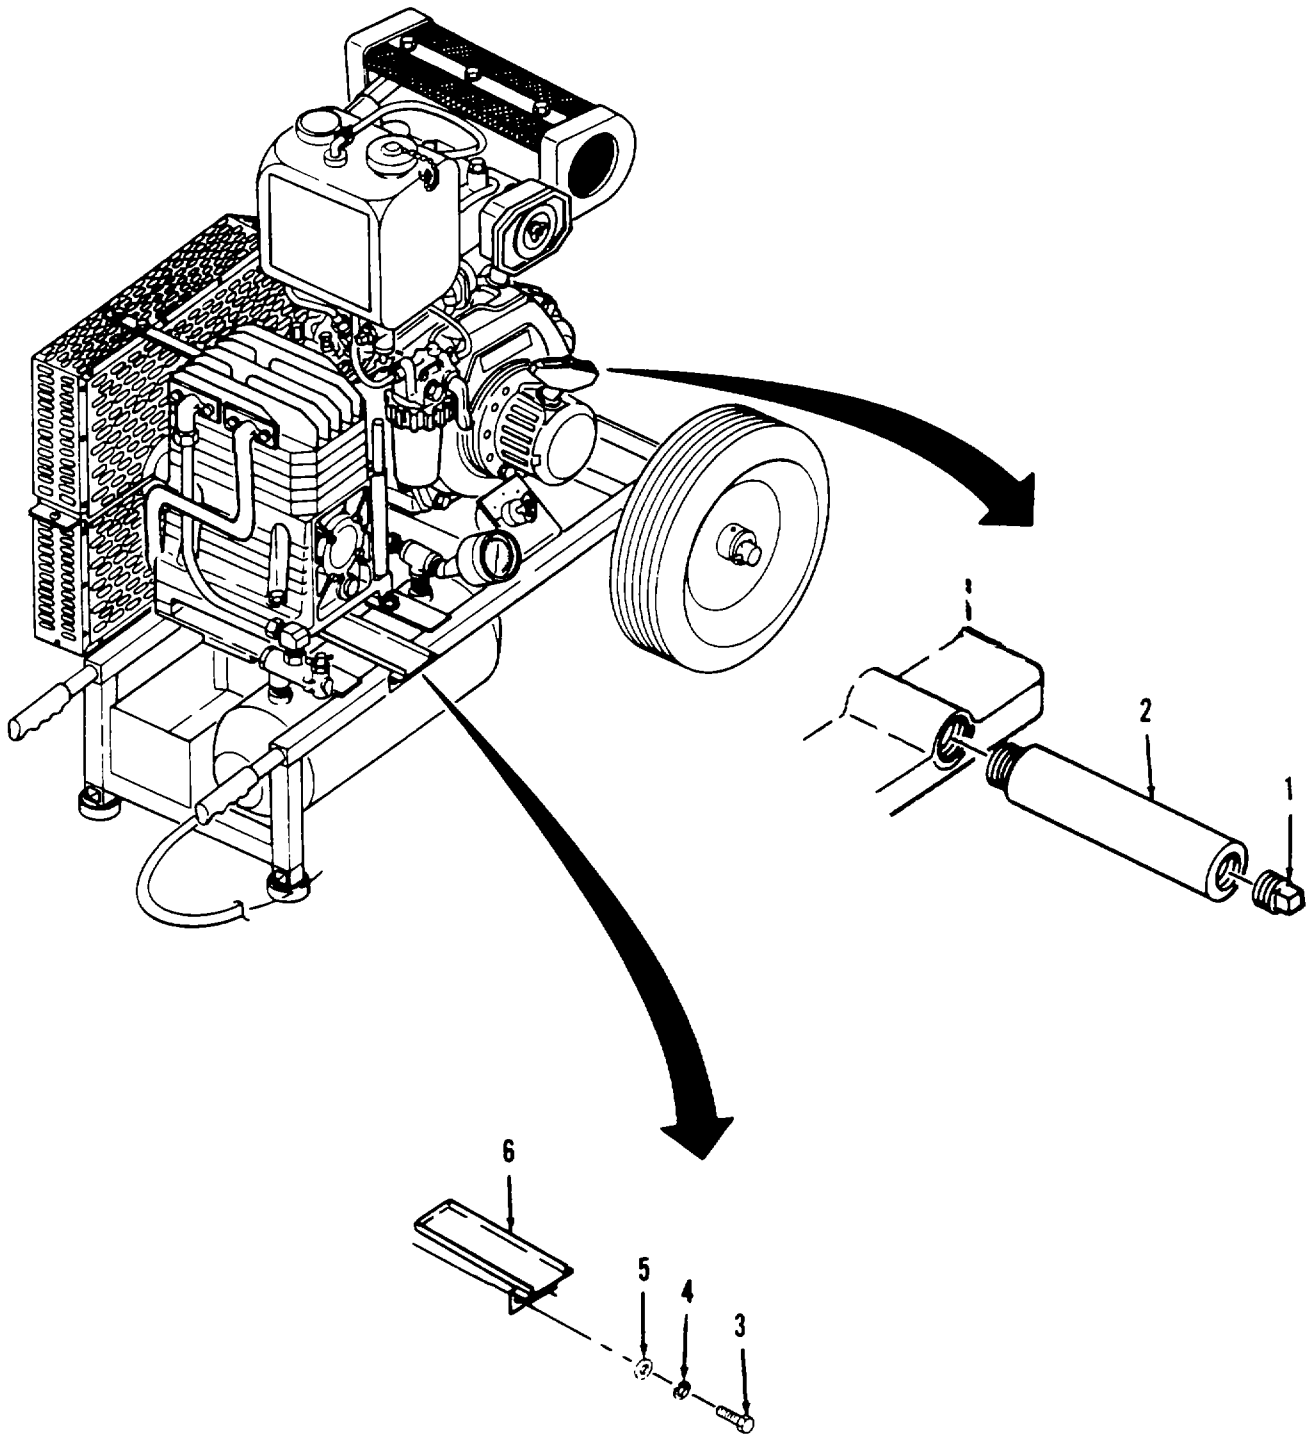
Compressor Oil Trough and Engine Oil Drain Repair and Replacement.
